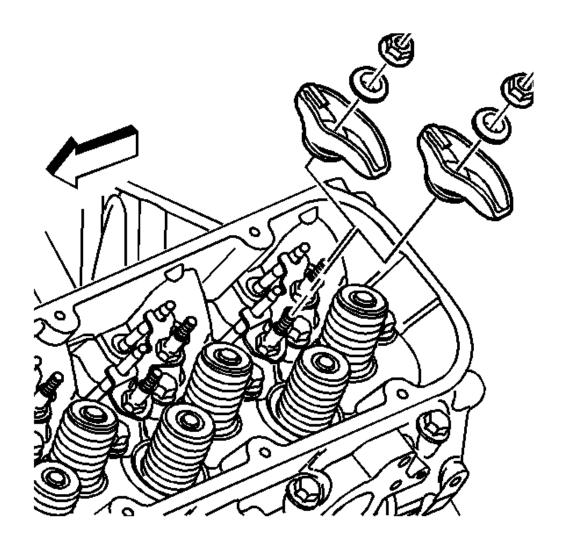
View Of Valve Rocker Arms Courtesy of GENERAL MOTORS CORP.
